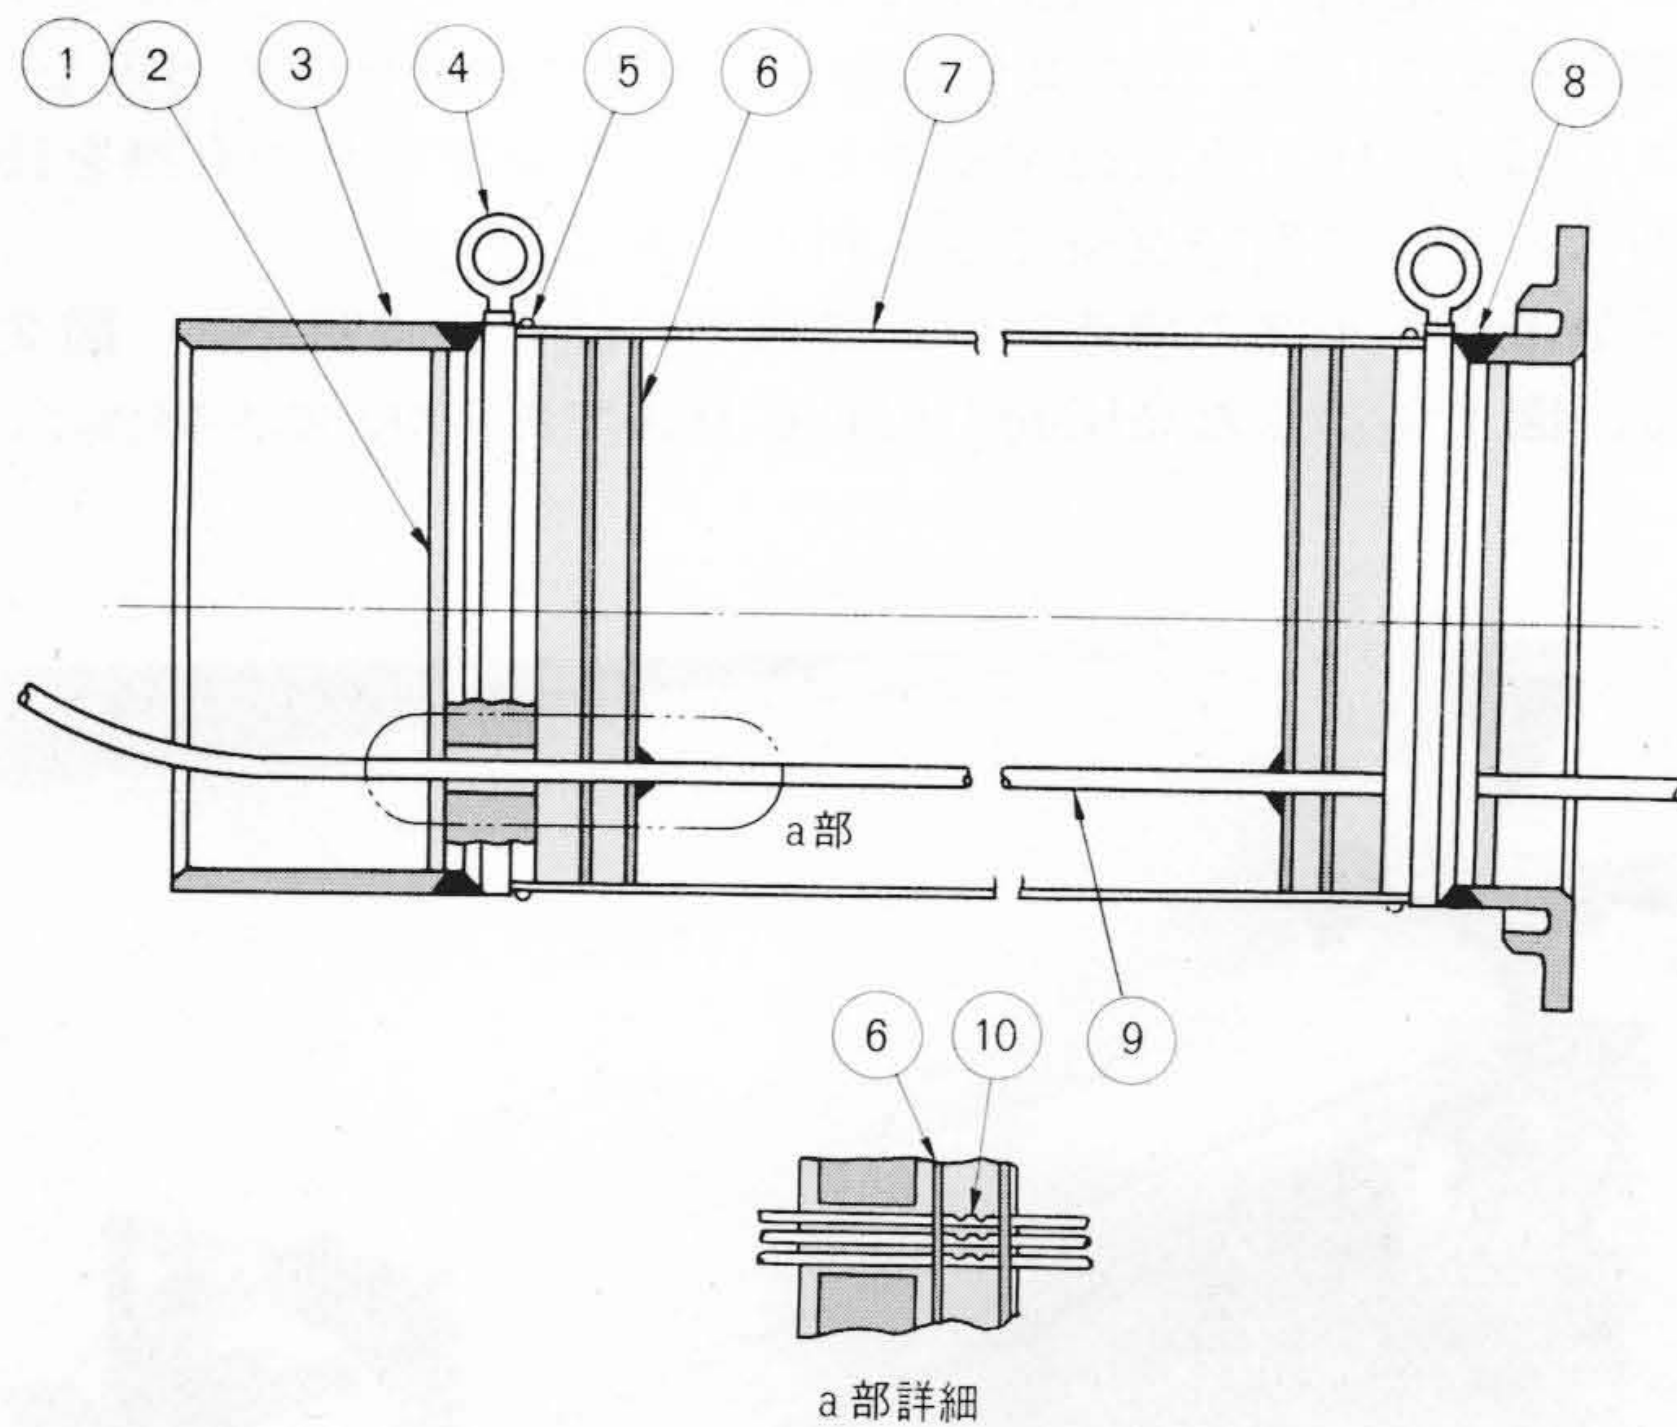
Medium Voltage Cable Penetration Assembly for Large (5,000V) Power Cables
